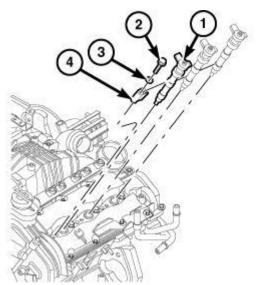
Camshaft Position Sensor, Connector & Bolt Courtesy of CHRYSLER GROUP, LLC
